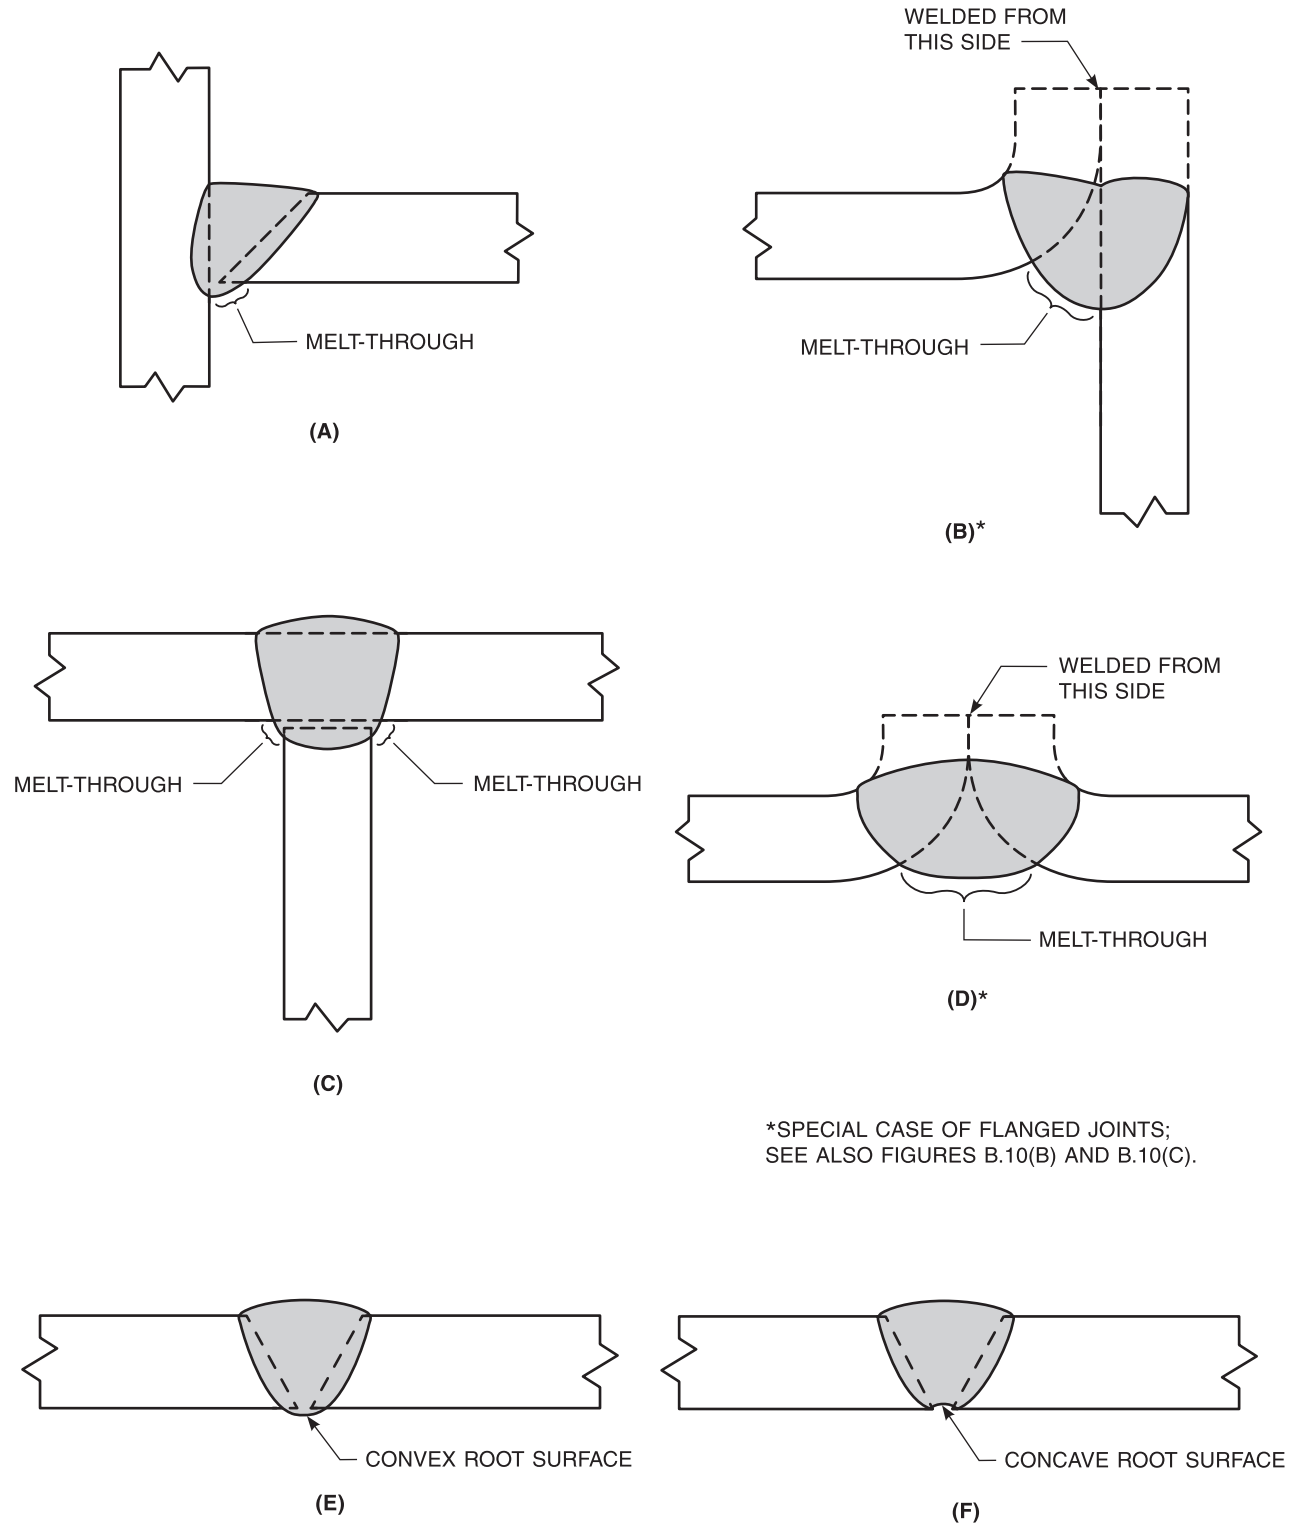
(Continued)—Groove Weld Size and Joint Penetration
